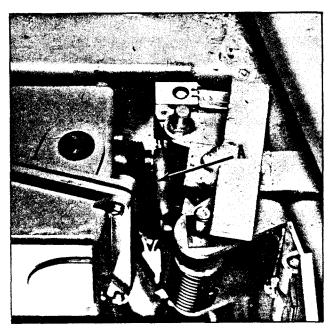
Combination Drive and Brake Control Rod Spring Adjustment
